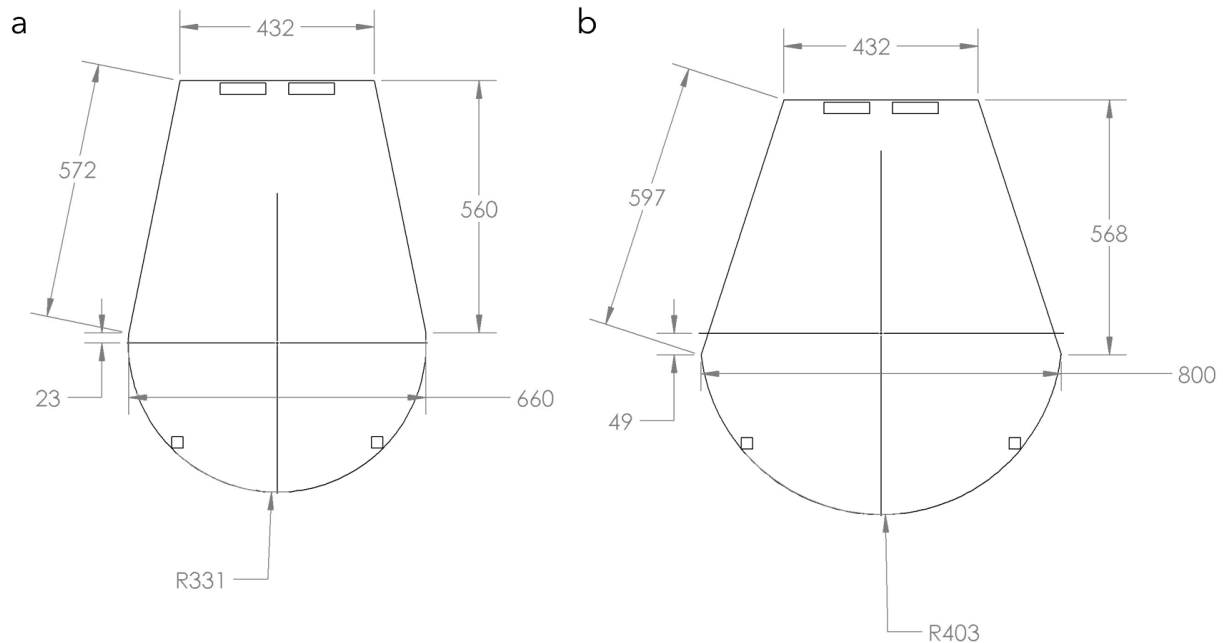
Dimensions of the drapes. a) Gurney version, b) Hospital bed version
